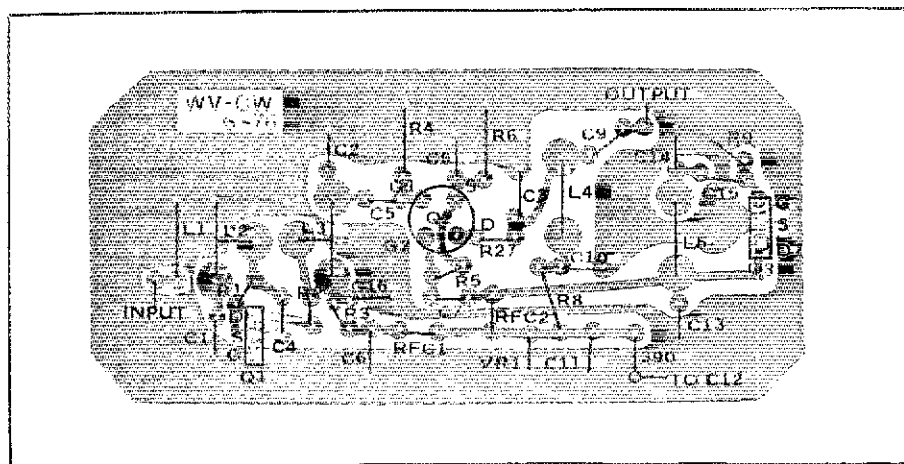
Etching pattern and parts-placement guide for the converter circuit board. 1/2-watt resistors were used throughout, but 1/4-watt resistors may also be used if preferred.
